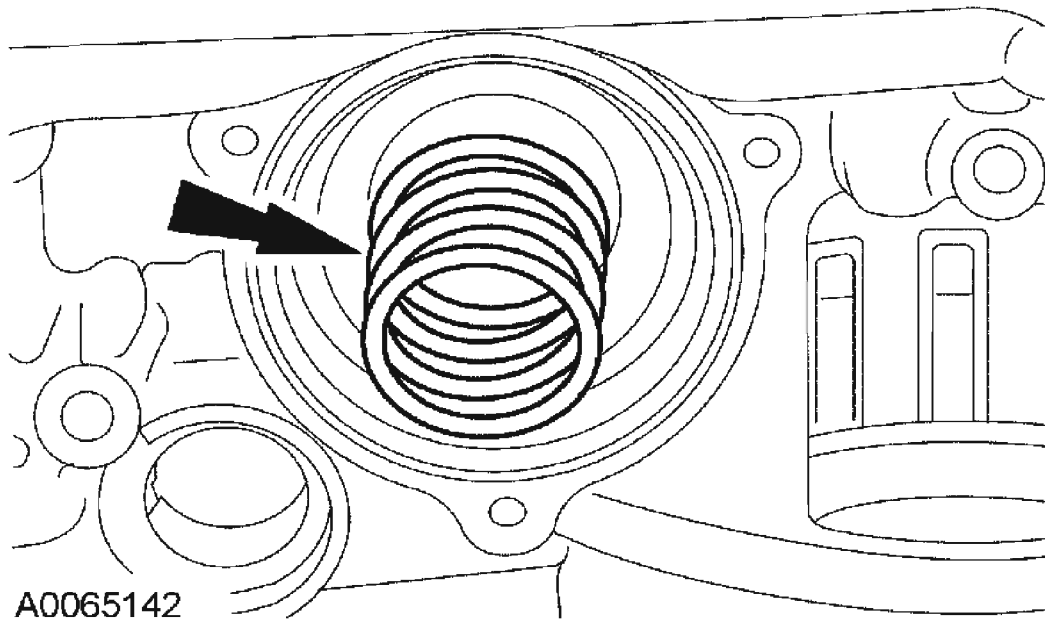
Removing Intermediate/Overdrive Servo Piston Return Spring
